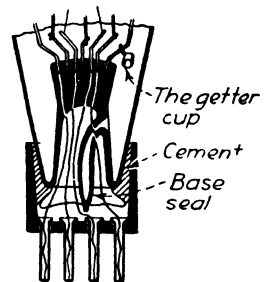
The base seal. The air and other gas remaining in the tube are removed through the glass tube which is then sealed.
